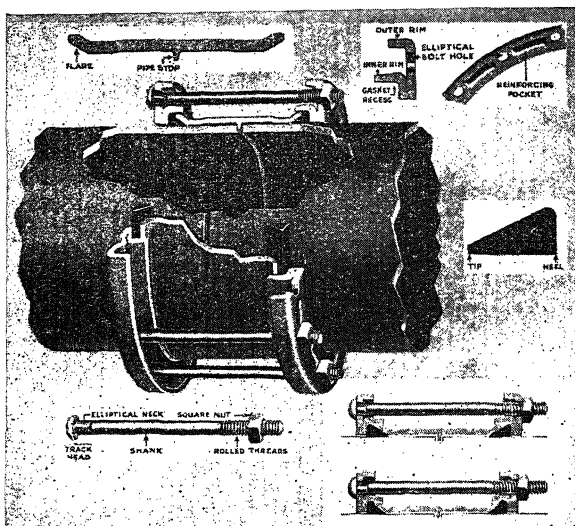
Compression sleeve (Dresser) coupling for plain-end cast-iron or steel pipe.
